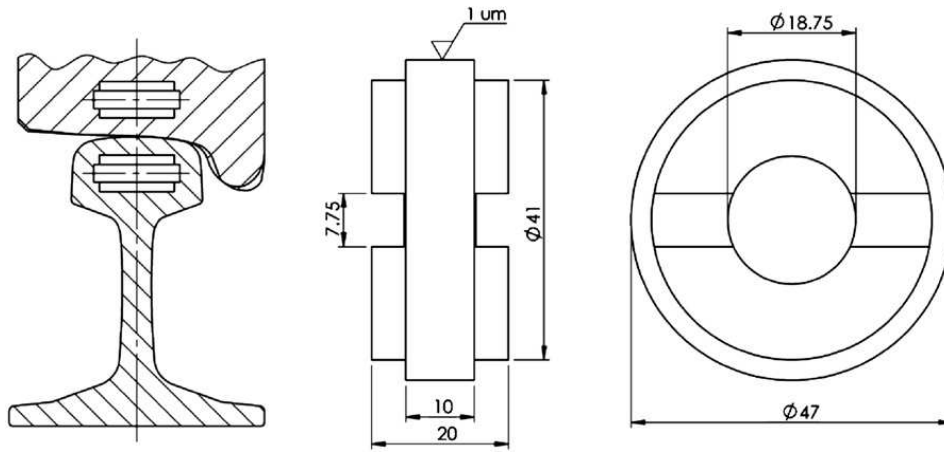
Cutting positions and dimensions of SUROS specimens (dimensions in mm)
